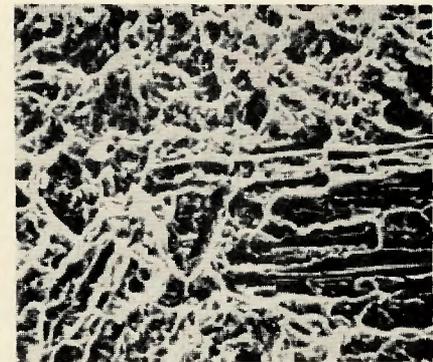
Fracture surface of joint containing 7.1% maximum residual copper (bonded 4 hr at 1700° F)—specimen W-12. X1000 (reduced 33% on reproduction)
